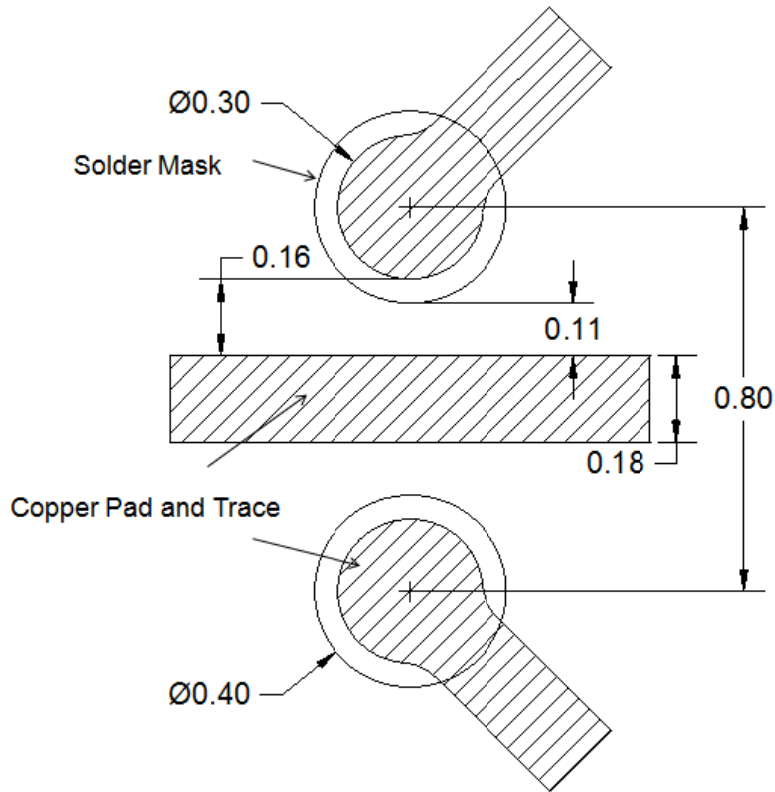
Copper Pad and Solder Mask for MSCP with 0.8 mm Pitch (in mm)
